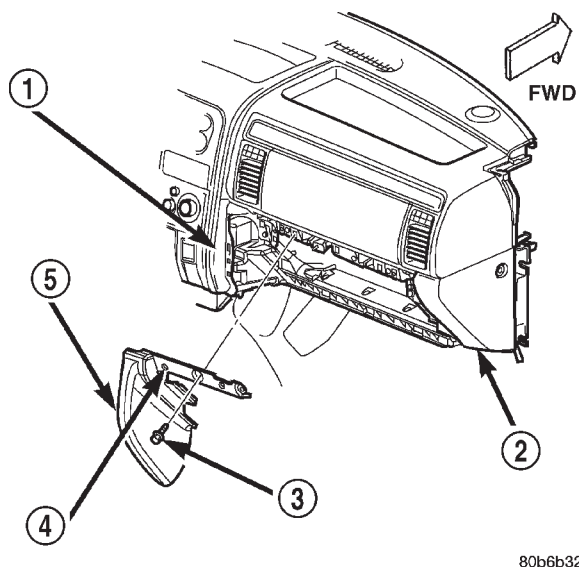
Instrument Panel Lower Right Center Bezel Remove/Install
